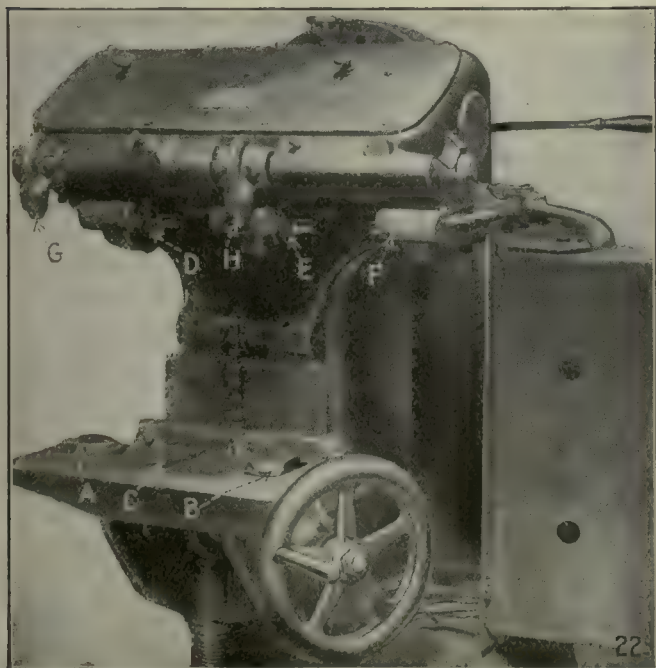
CHAMFERING ENDS OF MAIN BEARINGS
